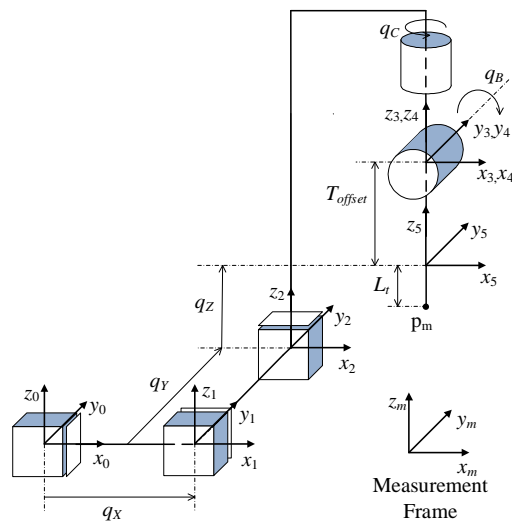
Diagram of axis kinematics for industrial 5-axis machine tool.
